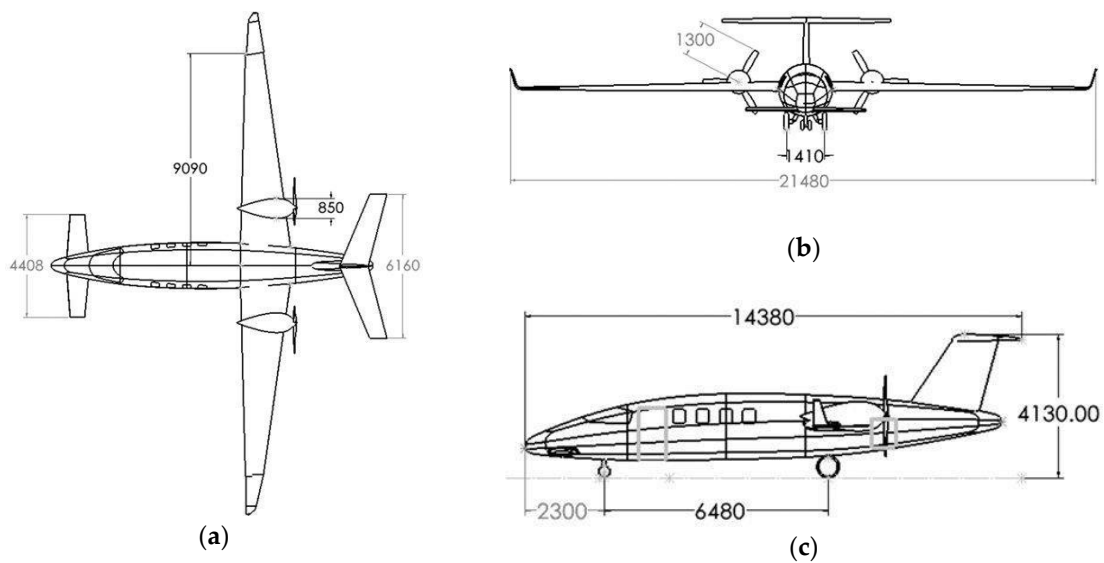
3 view drawing of JMAF-18: (a) Top View (b) Front View (c) Side View
